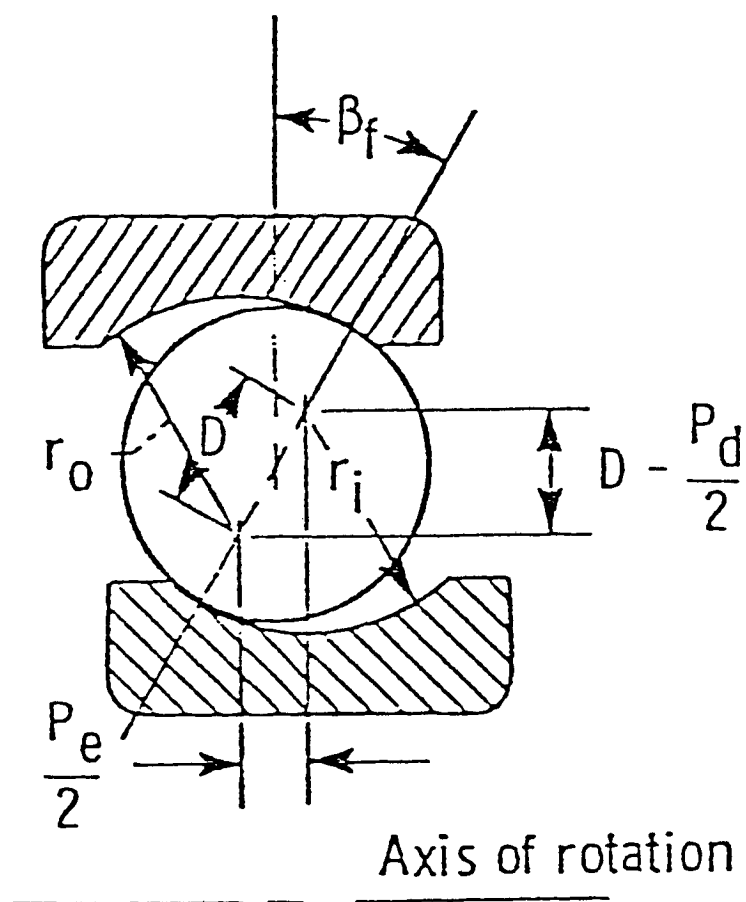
Cross section of shifted ball bearing showing ball-race contact.
